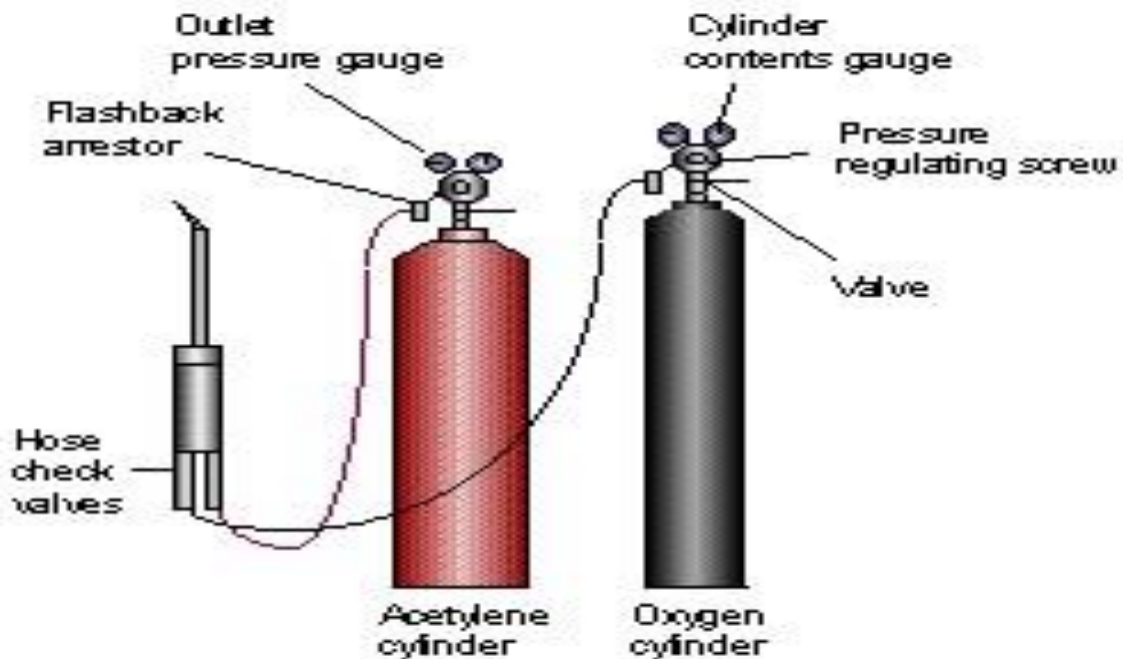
Oxy- Acetylene Welding Equipment
